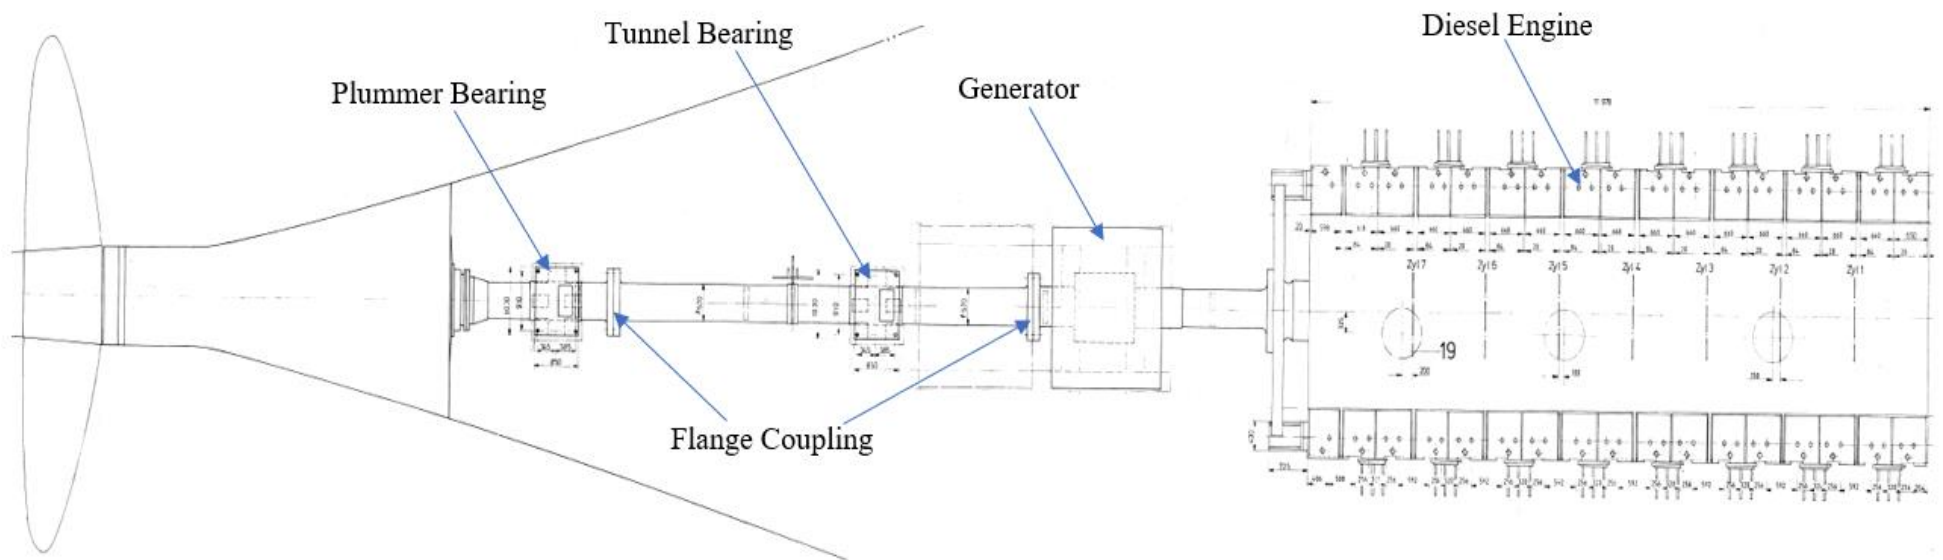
Shafting Arrangement of the Container Vessel - Topview (Layout from Engine Block up to Propeller)
